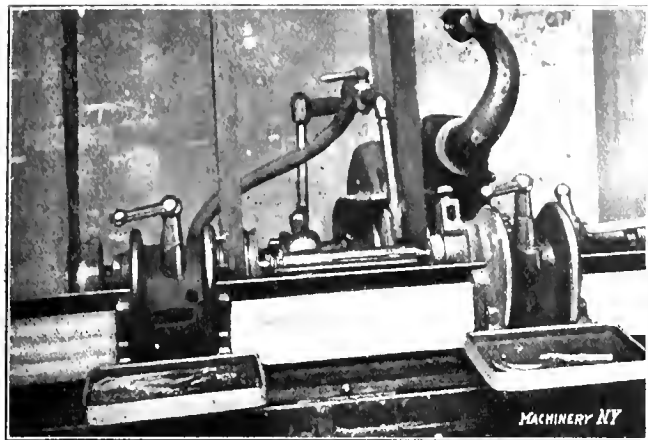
Grinding the Body of a Foot-stock Center—Second Operation
